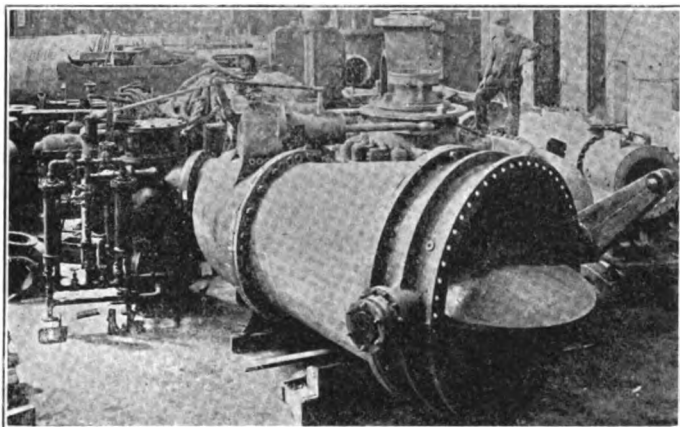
SHOP ASSEMBLY OF 15,000-H. P. TURBINE UNIT
